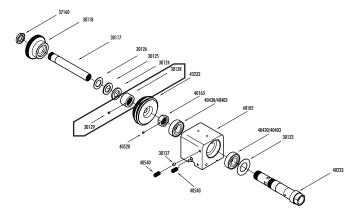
The outlined part numbers refer to 301283C—Spindle "End Cap" and 30129—5-40 x 1/8" Cup Point Set Screw.
